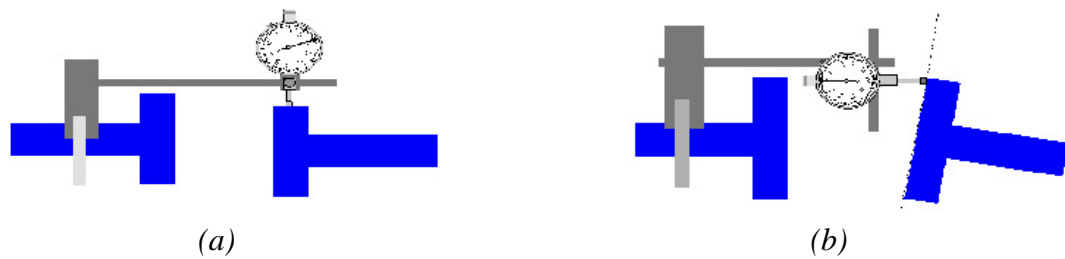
Offset measurement technique (a) Trim dial indicator (b) Face dial indicator [23].
